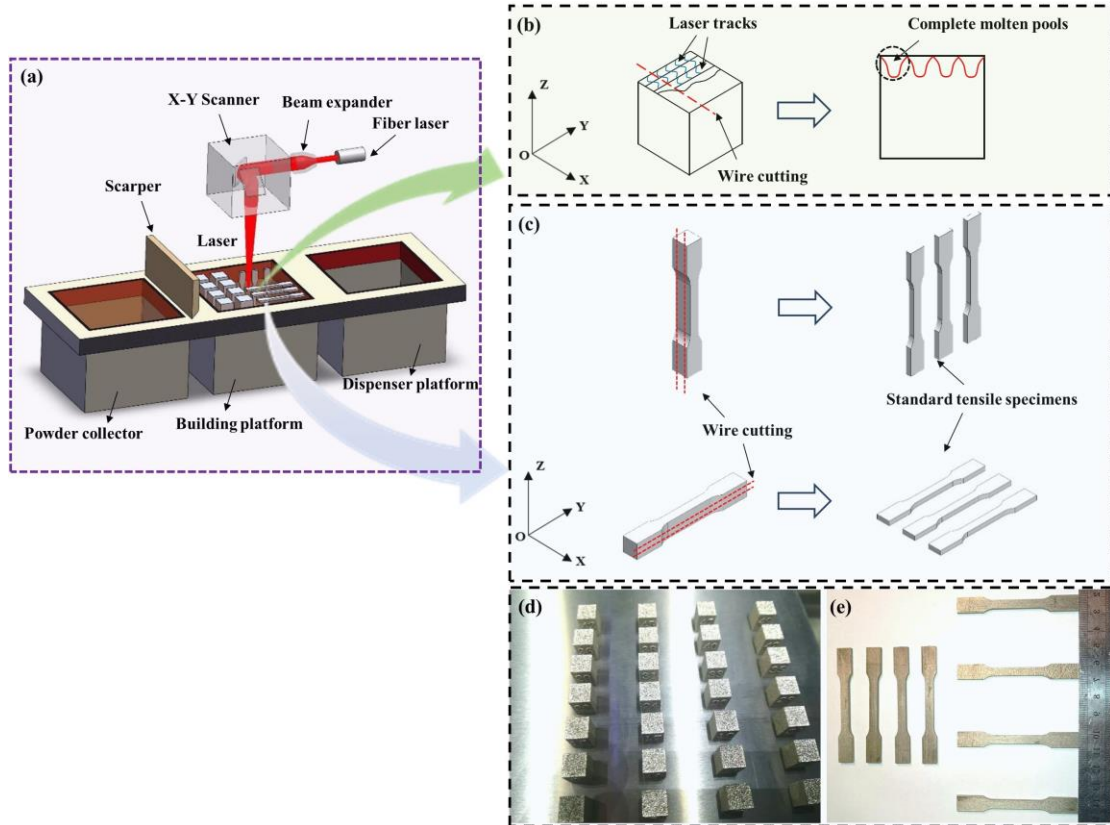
Schematic diagrams showing the L-PBF system: (a) L-PBF processing, (b) blocks fabrication, (c) tensile samples fabrication, (d) blocks samples, (e) tensile samples.
